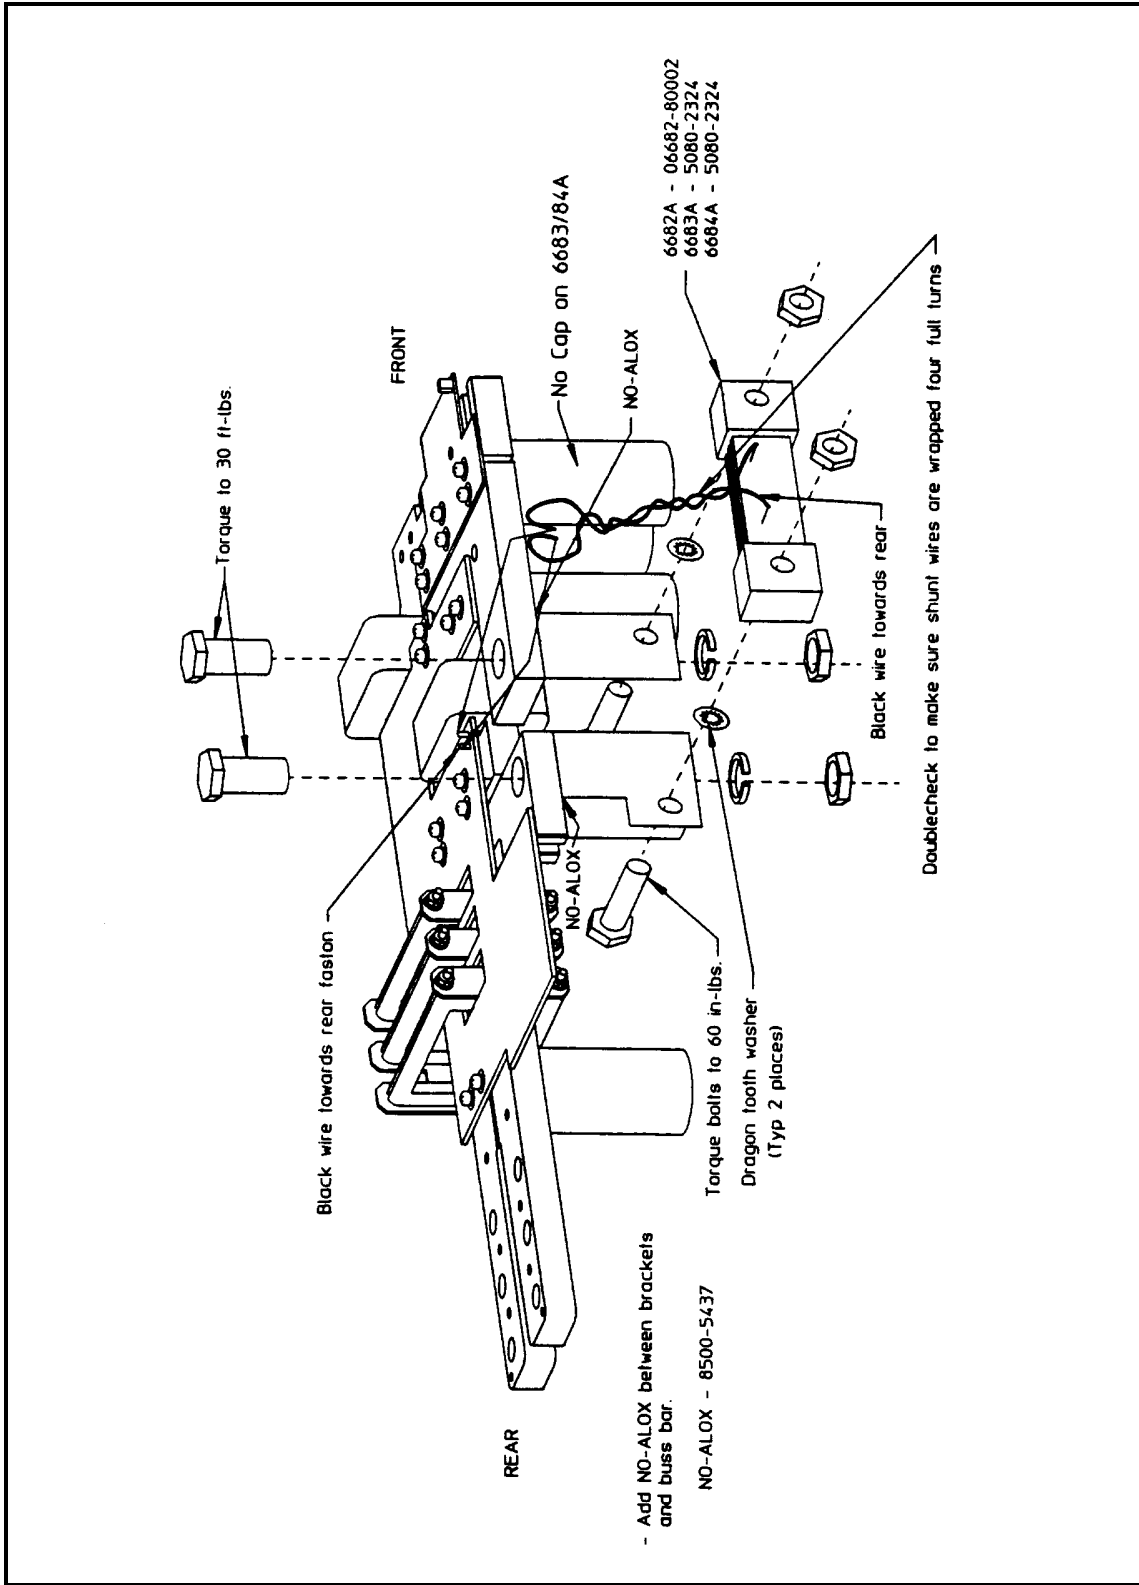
Assembly A10, Exploded View (6682A, 6683A, 6684A)
